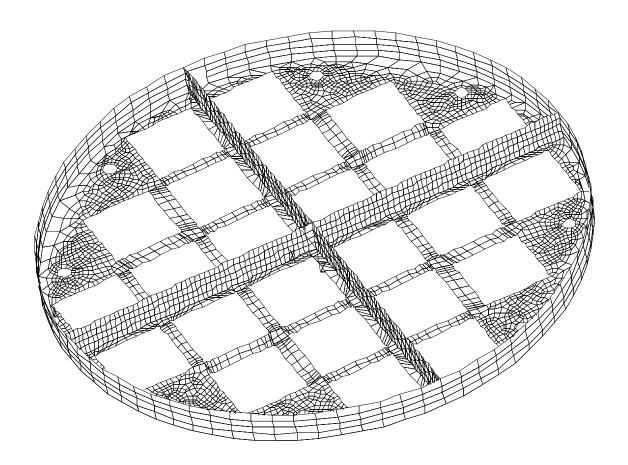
PWR Bottom Weldment Plate Finite Element Model
